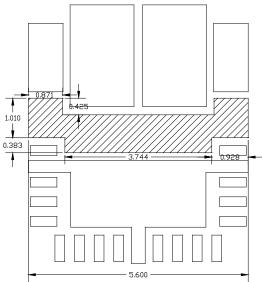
PCB Pad Sizes Detail 2 (Dimensions in mm)
